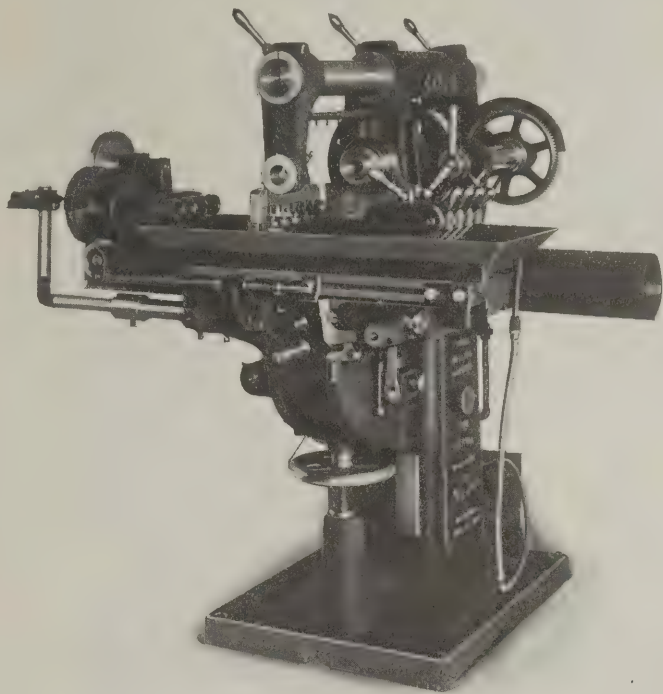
Garvin No. 13 1/2 Automatic-index Milling Machine
